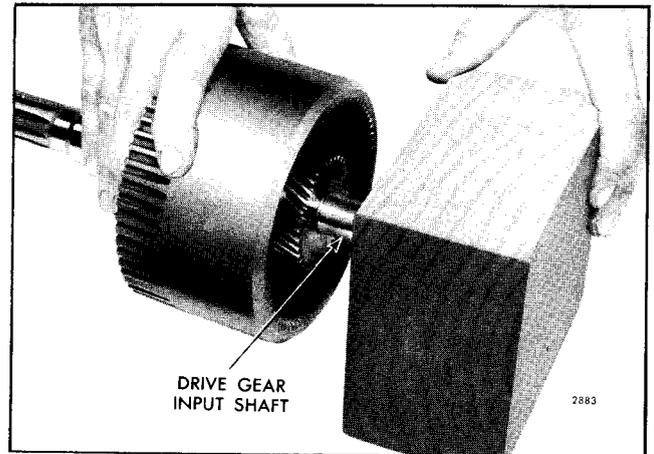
Placing Wood Block over End of Drive Gear Shaft
